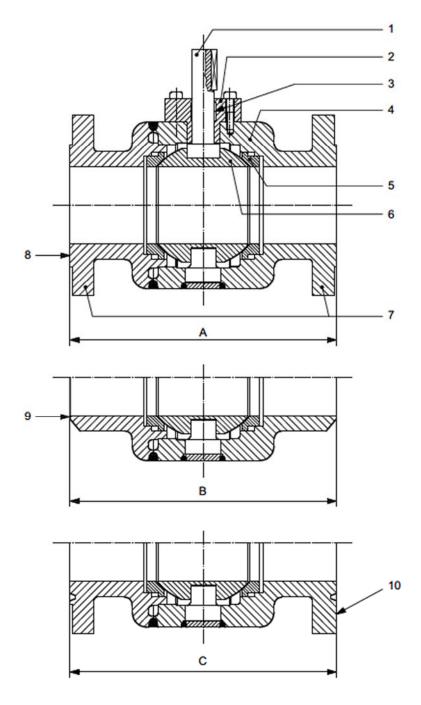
Ball Valve (Welded-body Trunnion Mounted)
